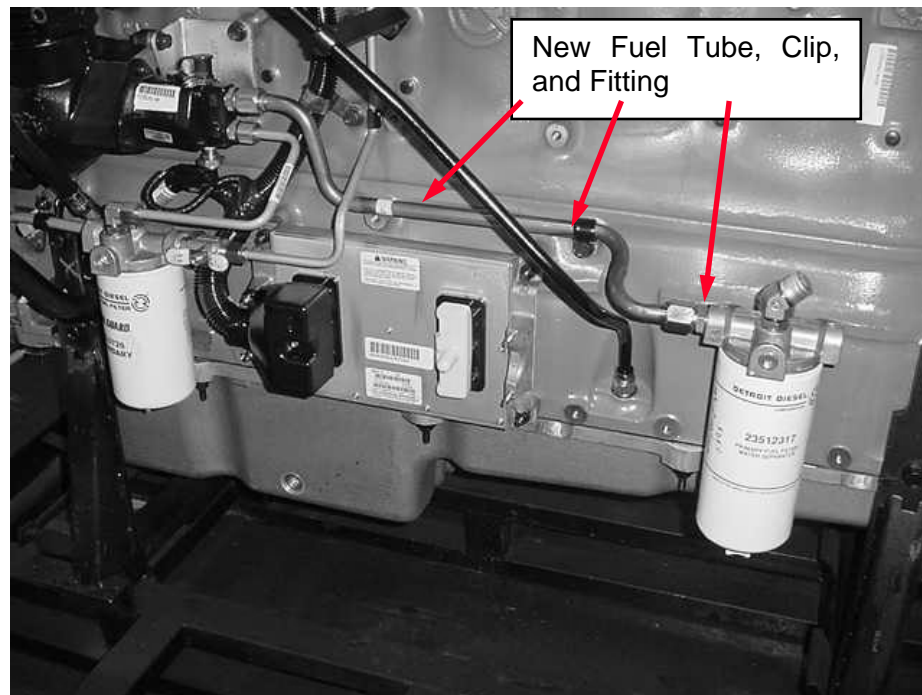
New Fuel Tube for Engines with DDC- Installed Primary Fuel Filter
